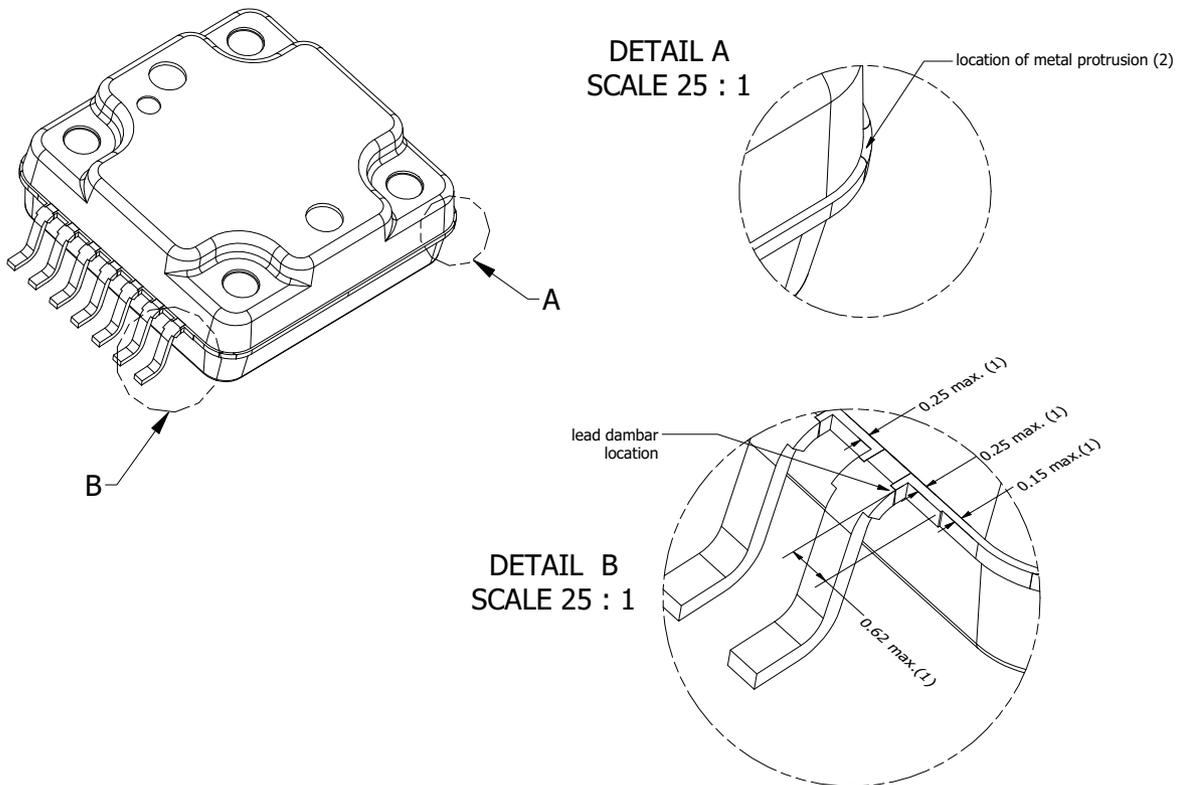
Package outline OMP-400-8G-1 (sheet 1 of 2)
